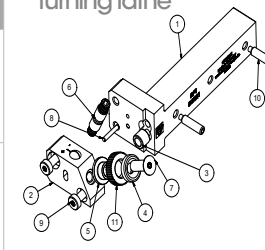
Series 231 exploded drawing Swiss type turning lathe
